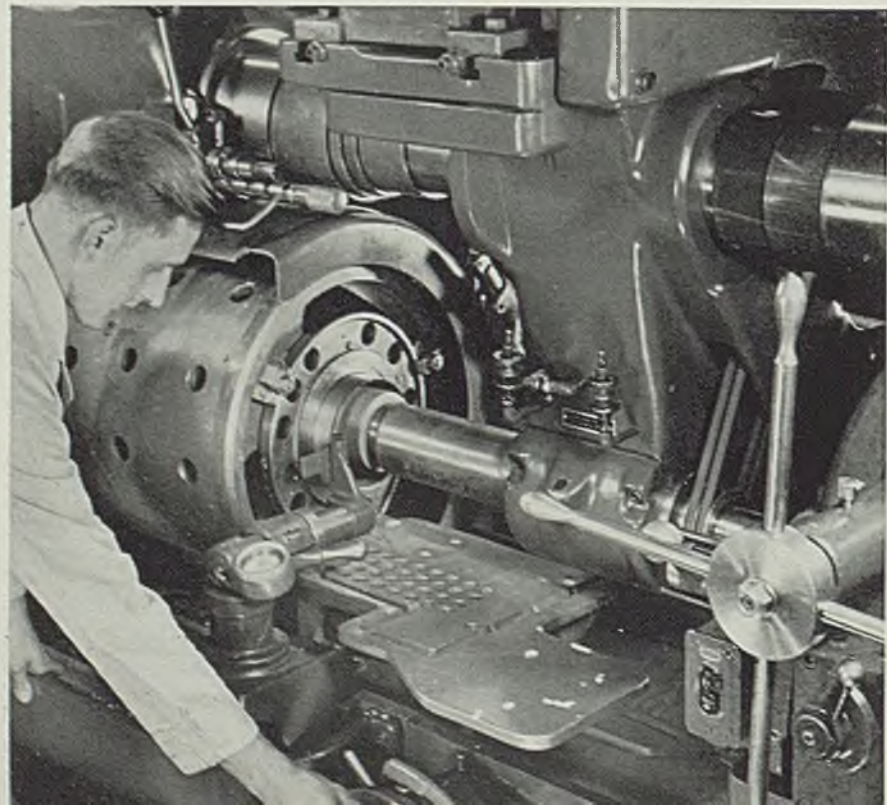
Finish grinding cylinder bore, bottom, in Bryant chucking grinder provided with special locating and holding fixture. Note dial gage for checking bore diameter—this being an integral part of the tooling setup
